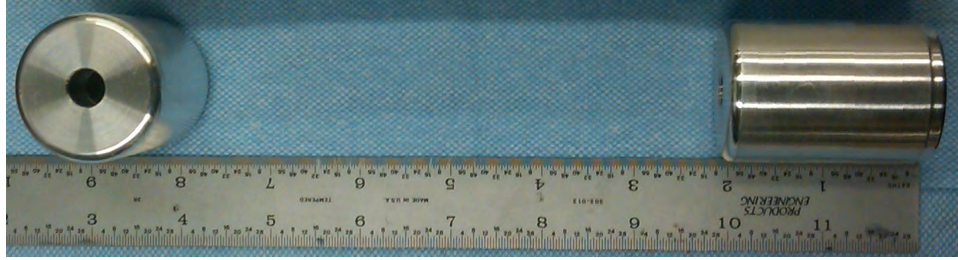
Aluminum alloy grip support plug inserts custom machined to each tube end to prevent grip section crushing during alumina and oxide-oxide CMC tension-torsion testing
